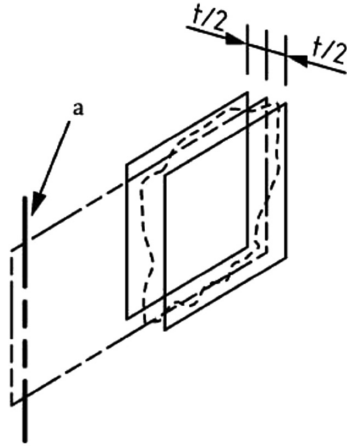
Tolerance zones - united geometry element source: [3]
